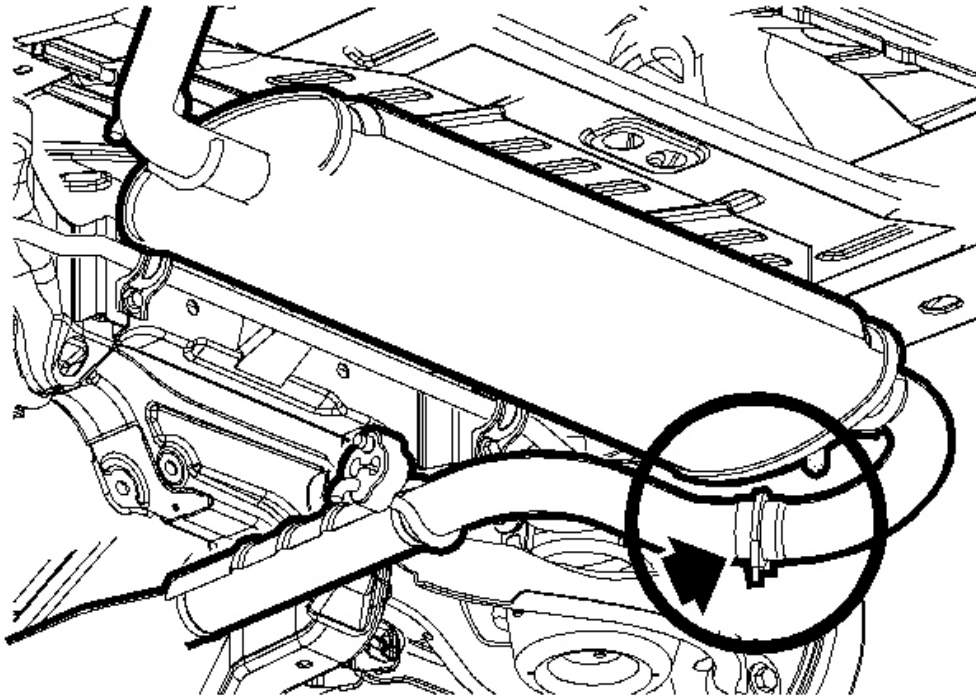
View Of Rear Muffler Pipe Service Clamp
